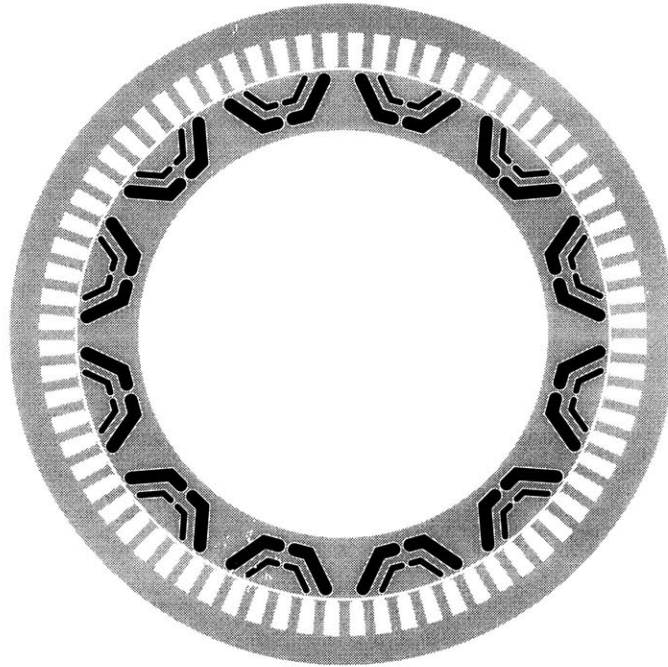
Machine cross-section of the optimal design for the ISG IPM machine drive.
